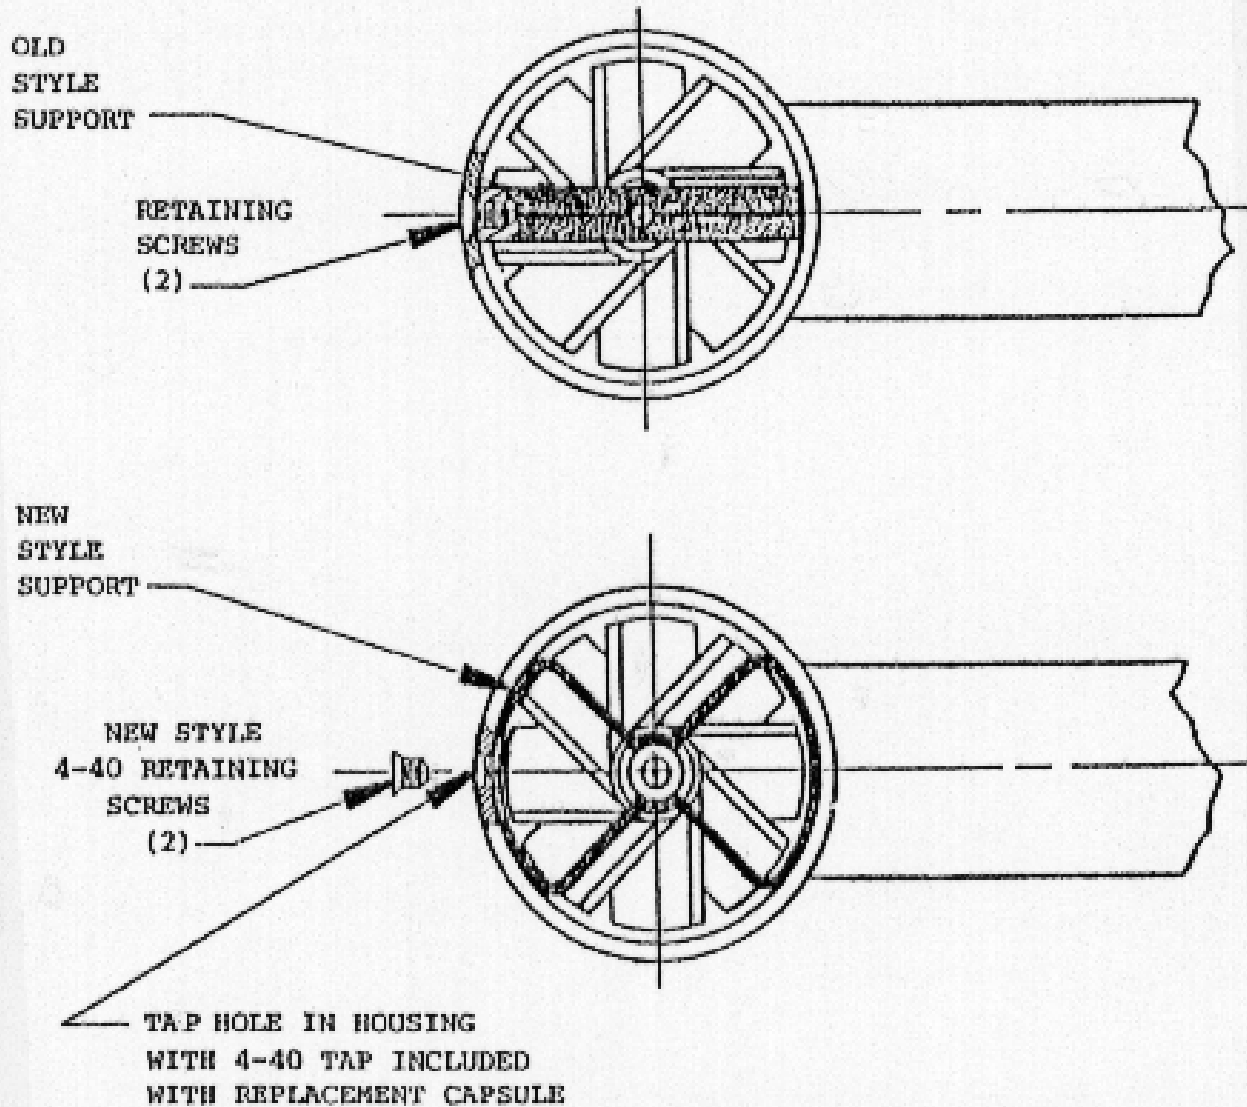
New and Old Style Rotor Capsule for Turbo-Probe<sup>®</sup>.
